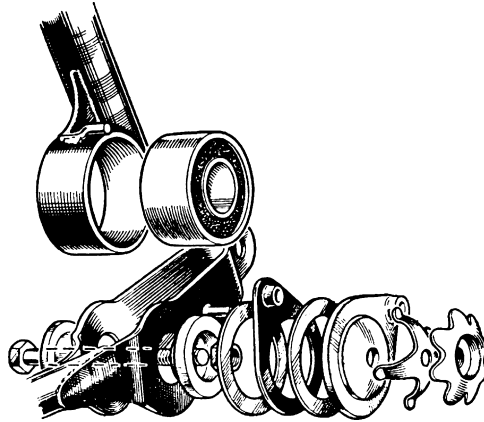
The Greeves motorcycle front suspension from around 1950 had a rubber-in-torsion spring, using an integral rotary dry friction damper easily adjustable by hand.
